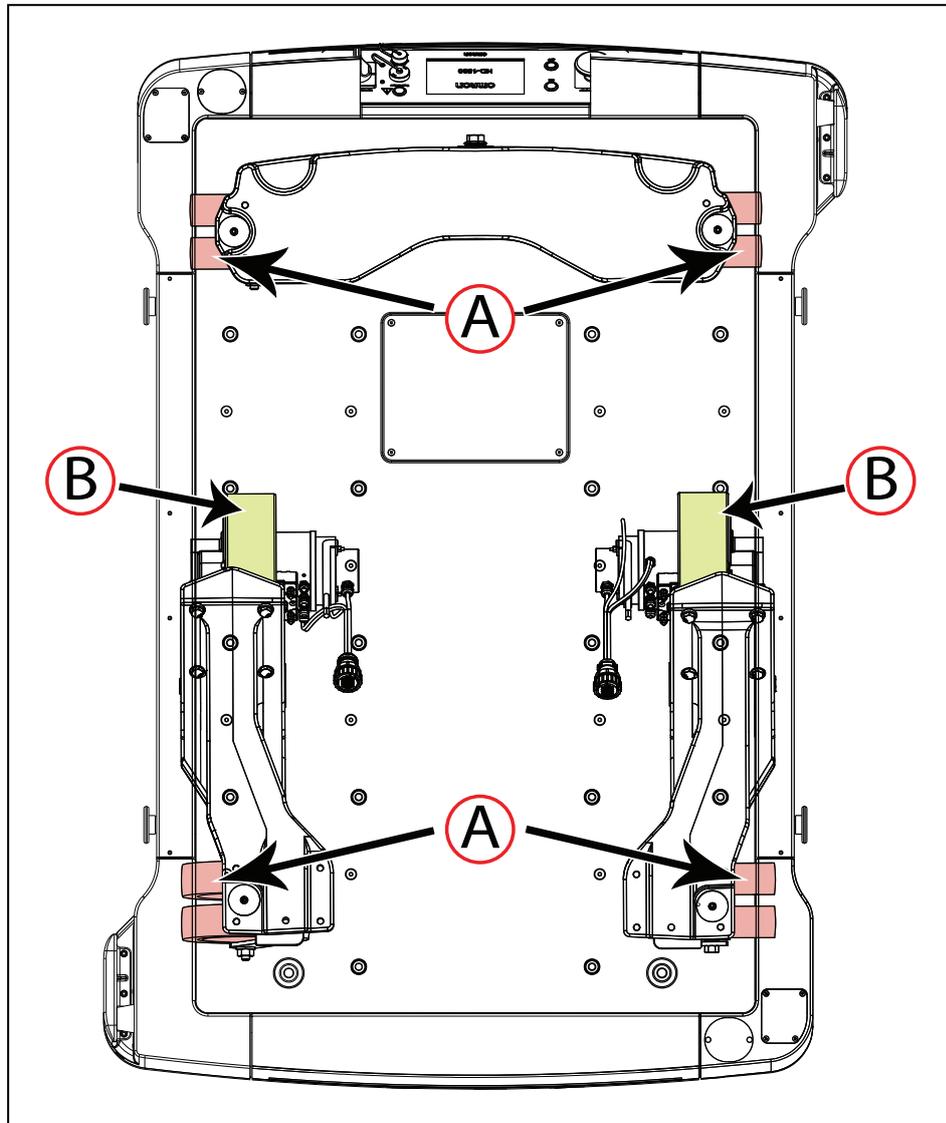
HD-1500 Drive Train - Top View, (A) Casters, and (B) Drive Wheels
